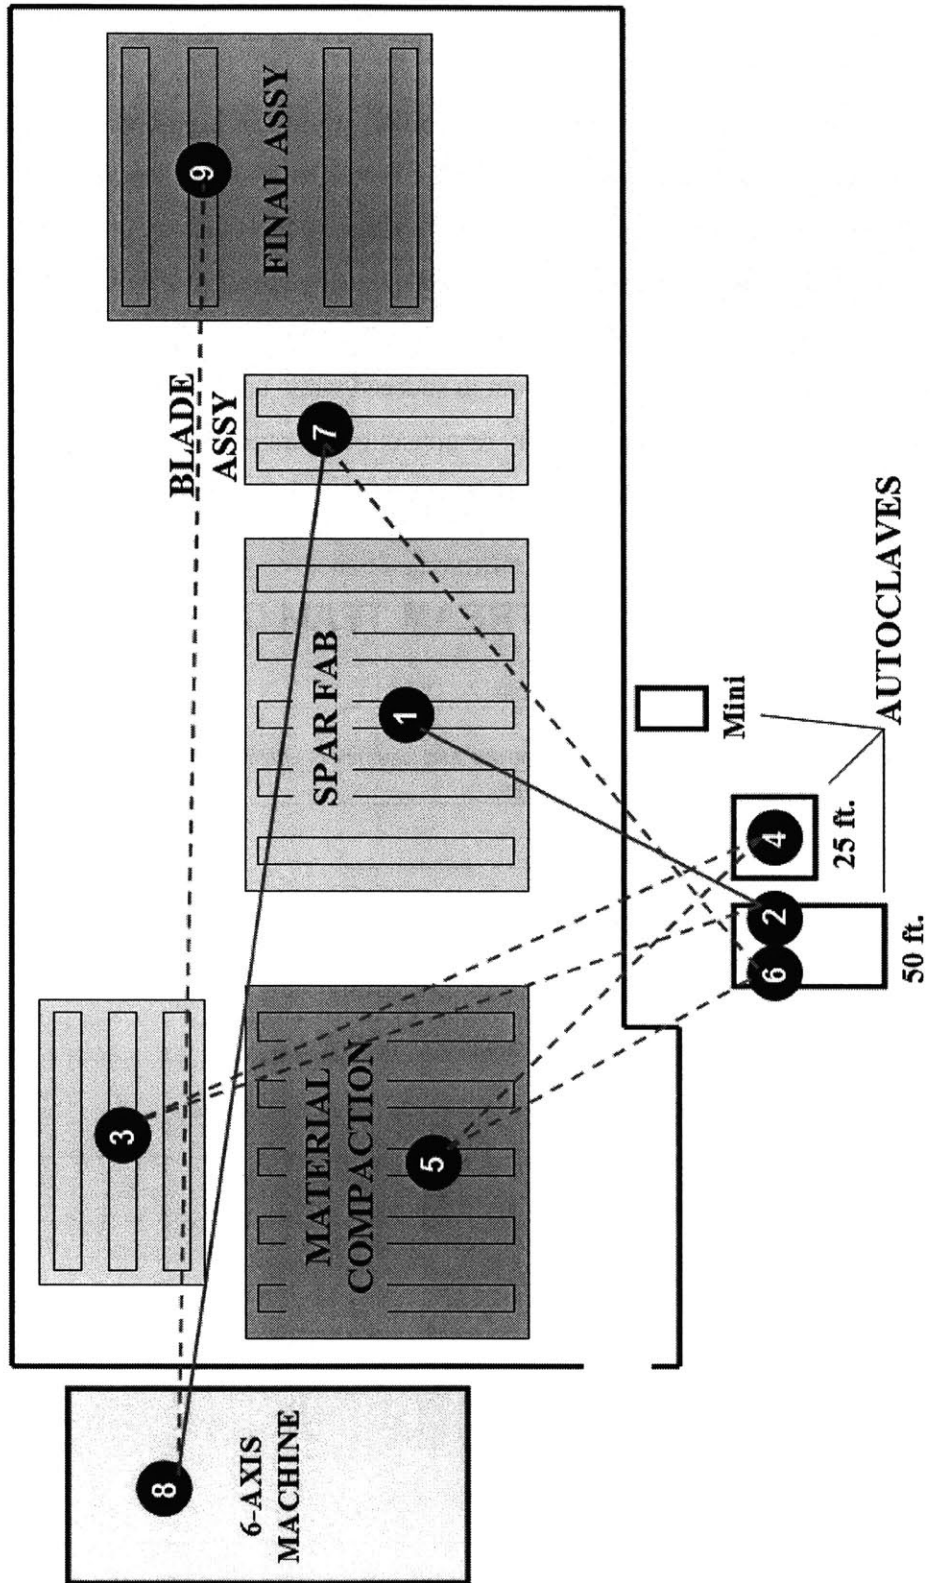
Site B Factory – Phase II Layout (Not to Scale)
